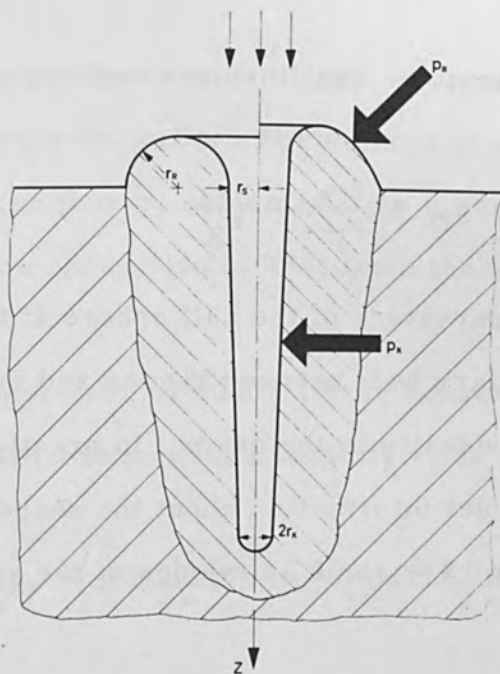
Schematic diagram showing the formation of the capillary in deep penetration welding.
